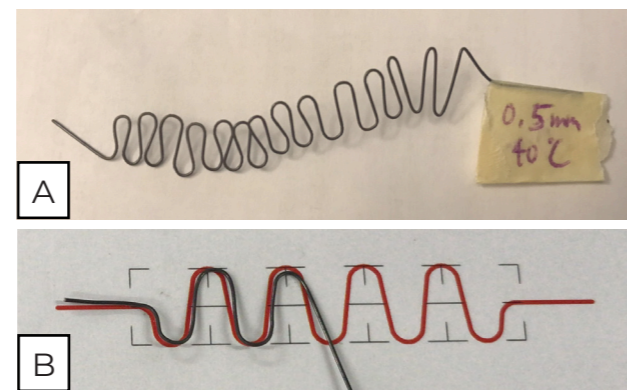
[A] FREE-FORMED ZIGZAG SPRING, [B] HAND FORMING ZIGZAG SPRING WITH A PRINTED GUIDELINE
